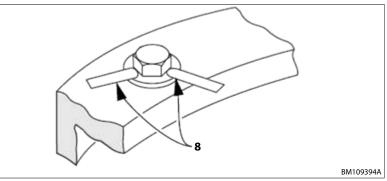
Turntable Side Bearing Bolt Feeler Gauge Check
